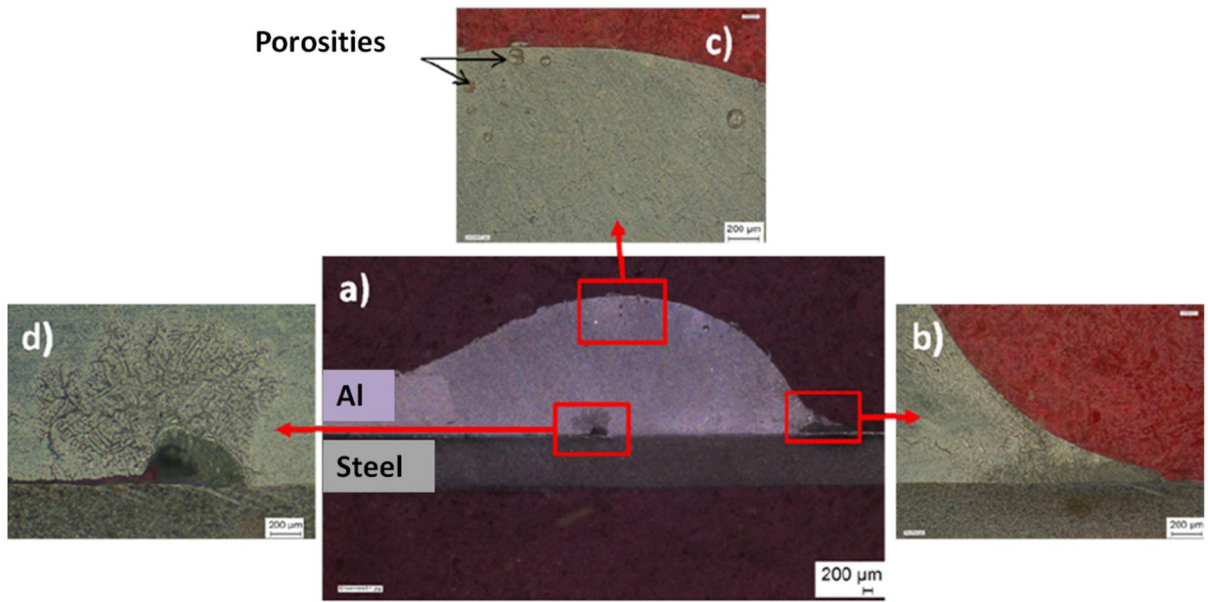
Typical cross-section morphology of steel-aluminum welds.
